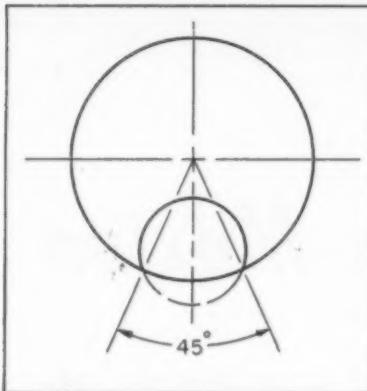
The eccentric pin is cut away so that full downward pressure is maintained over 45 degrees rotation of the operating handle as shown in Fig. 4
